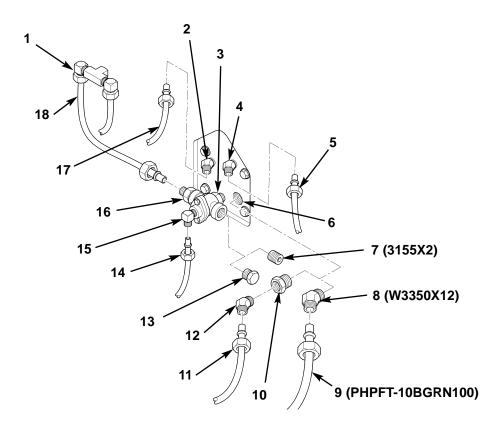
Installing 5/8 Tube on Brake Treadle Valve.
